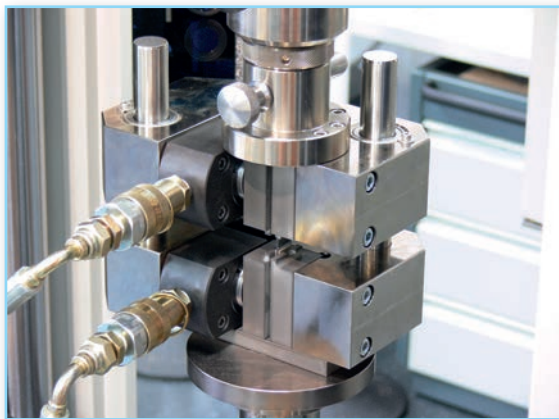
Test fixtures mounted on specimen grips via T-slotted shoe connectors greatly simplifies equipment.
